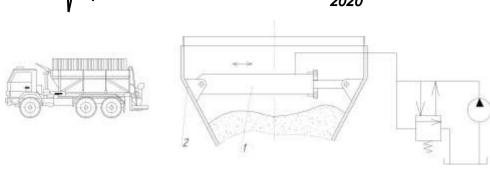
Vibrating hydraulic impulse actuator for unloading the dump truck of the sandblasting machine
